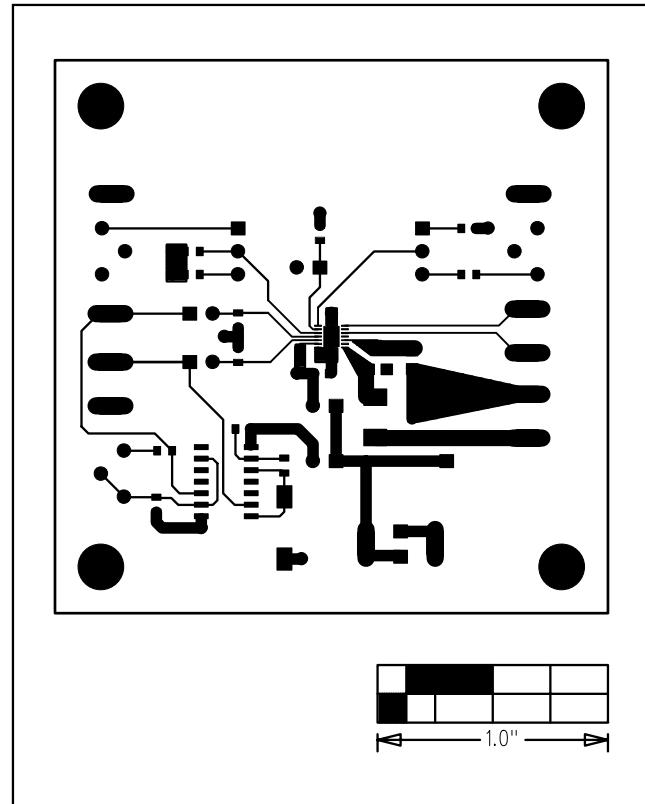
MAX4990 EV Kit PCB Layout—Component Side
